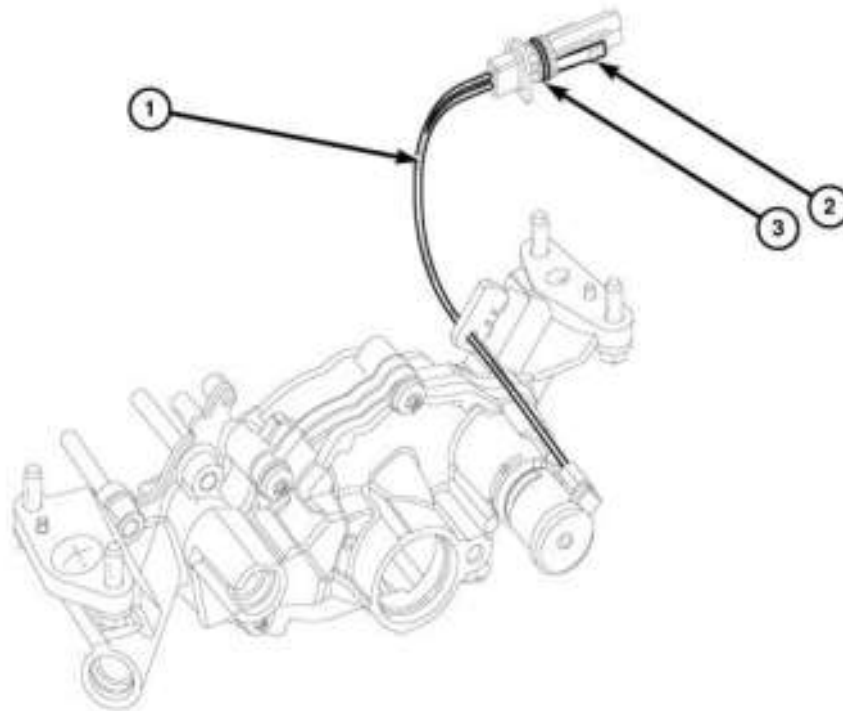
Solenoid Wires, Connector Retention Lock Tab & O-Ring Seal
